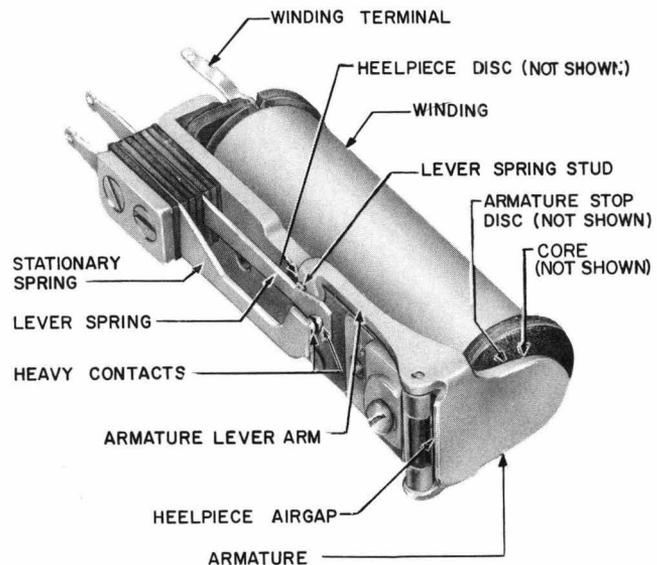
Fig. D — Relay With Nonbifurcated Contact Springs and Heavy Contacts — Used in Recorder-Reproducer Mechanism
